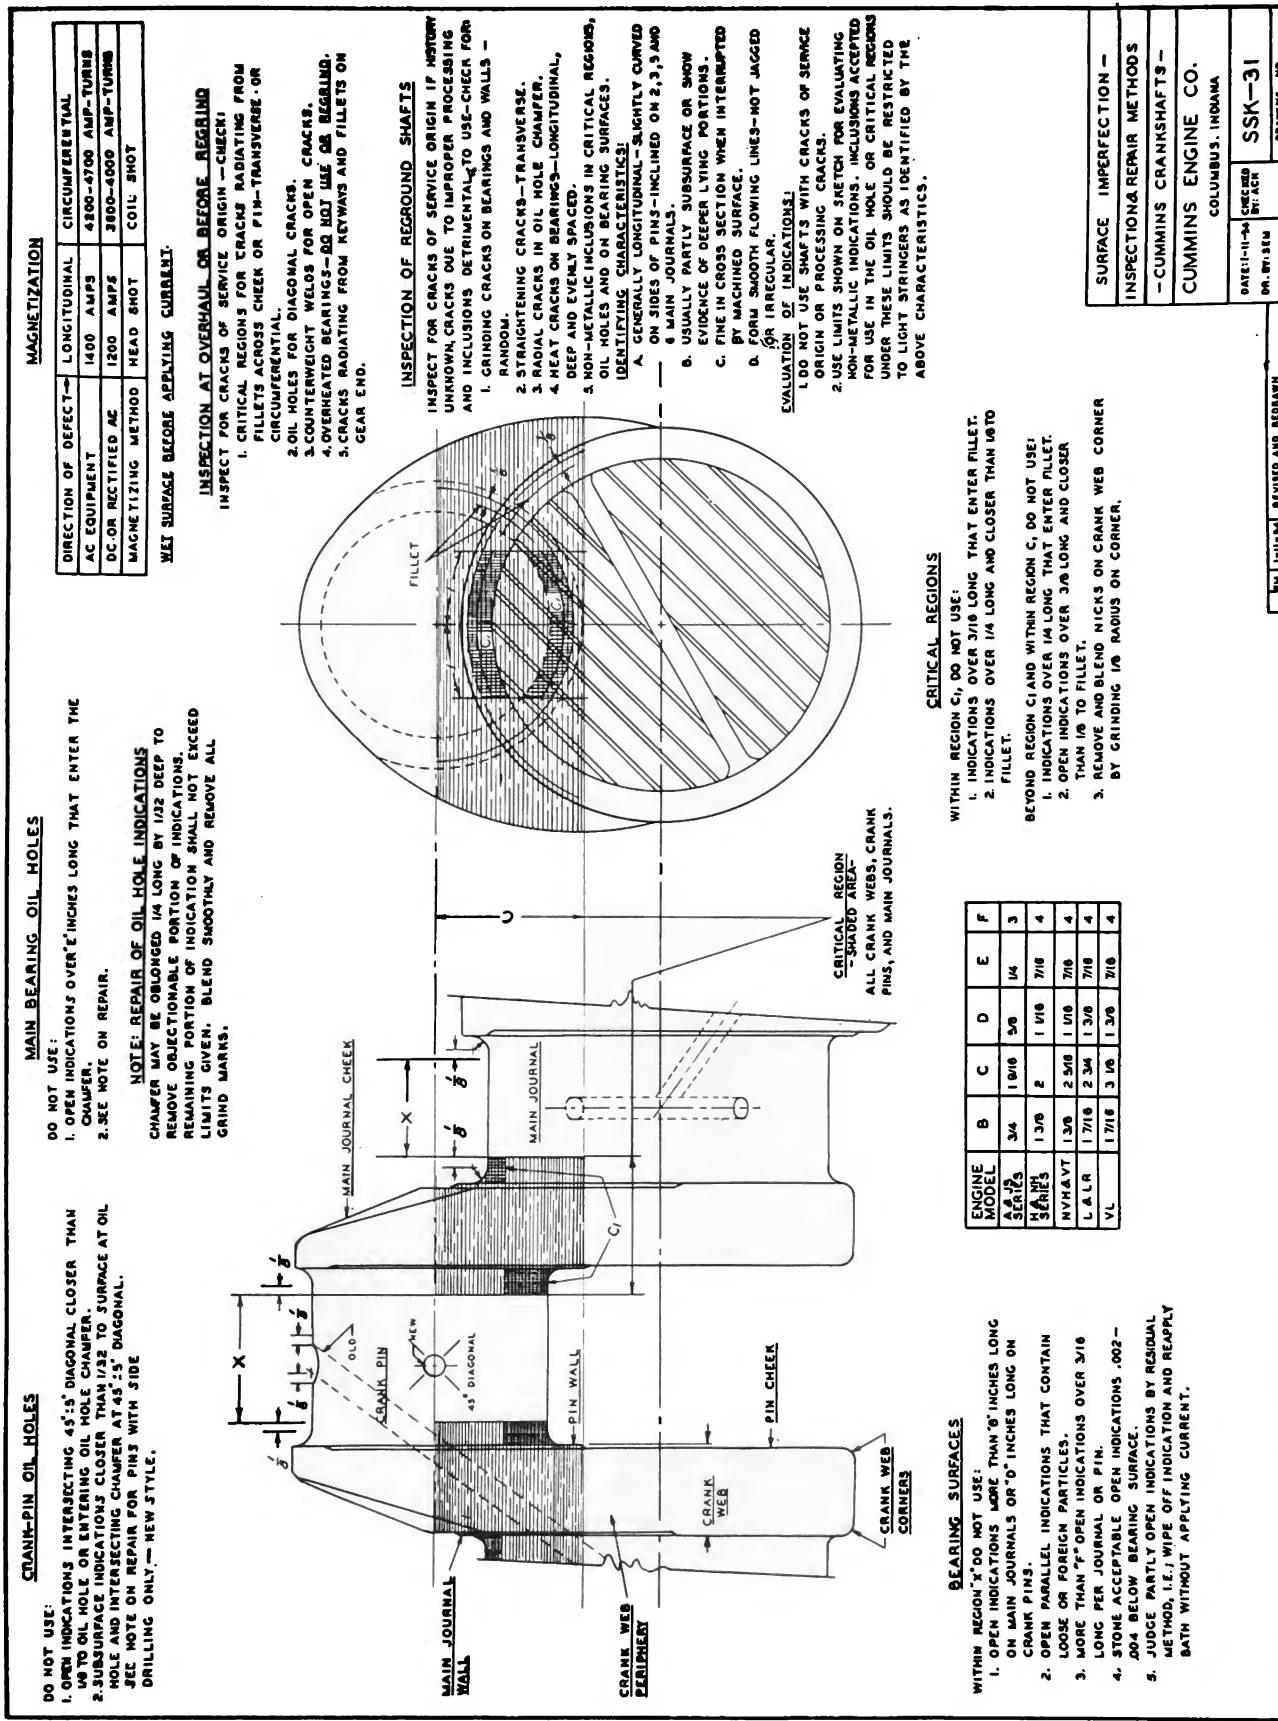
Magnetic inspection of Cummins crankshafts
